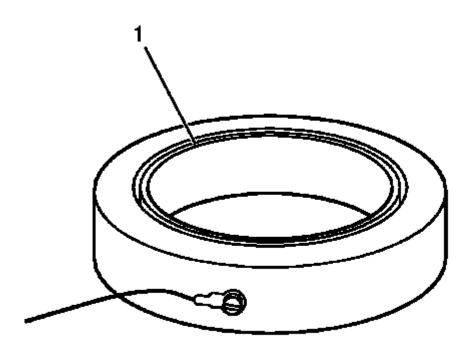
Identifying Catch Plug Positioning Courtesy of GENERAL MOTORS CORP.
